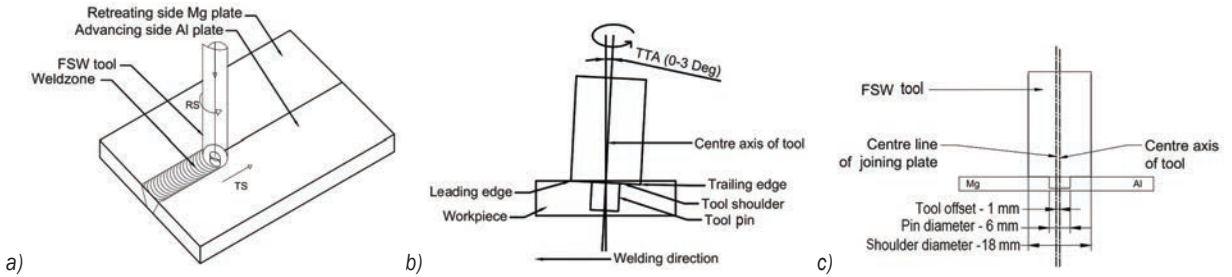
a) FSW process, b) tool tilt angle, and c) tool offset
